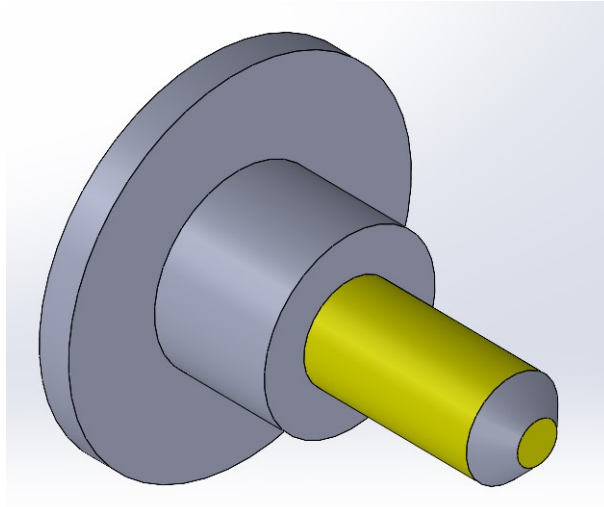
Milling tool centering stud with diamond turned chamfer.
